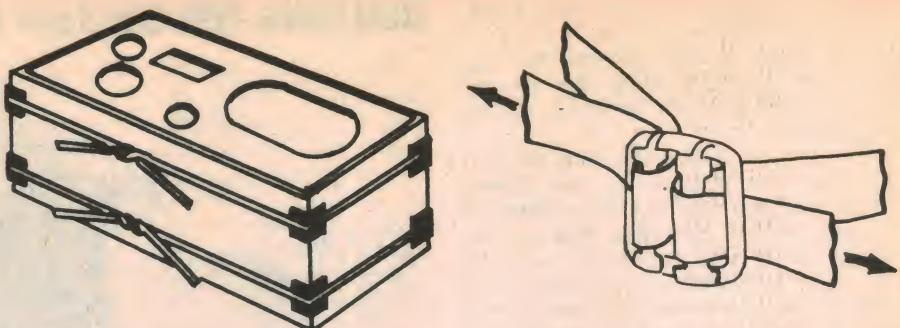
(left) shows how the straps and edge blocks supplied with the CK3 cabinet kit are used to hold it firmly while the glue sets. Fig. 4 (right) is a detail of way the strap is threaded through the buckle.
